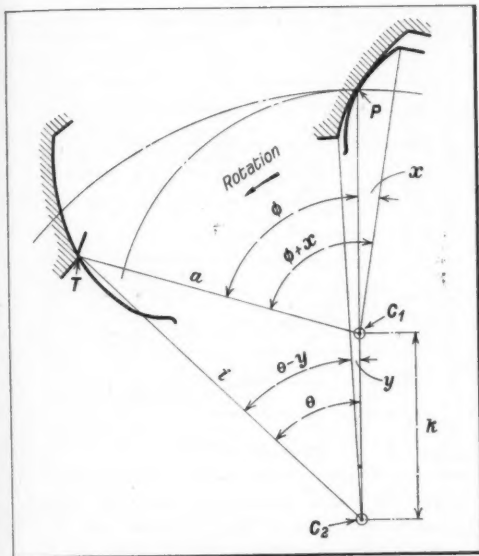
Diagram illustrating disengagement interference in involute internal gears
